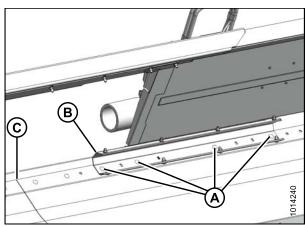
Left Stripper (Auger Not Shown for Clarity)
